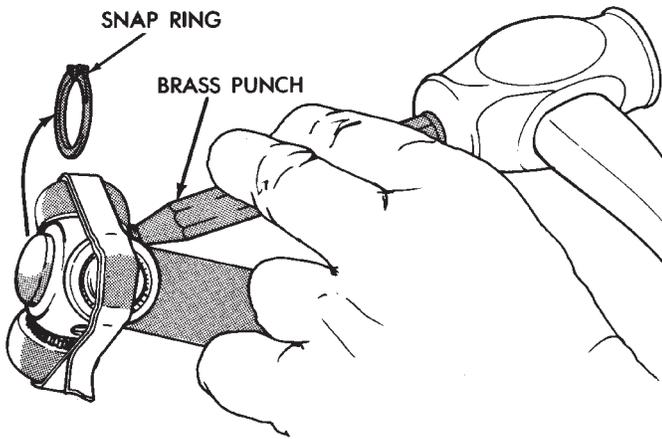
Tripod Assembly Removal From Interconnecting Shaft
